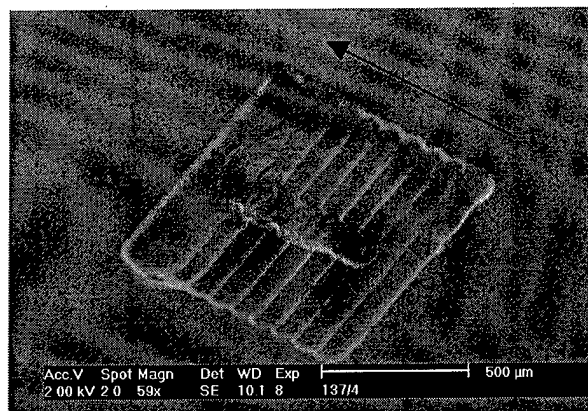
Machined structure in a Pyrex glass wafer, using measuring feedback. In the middle two other additional machining steps were done to correct the surface. The profiles are shown on figure 15. All machining were done at 30V.
